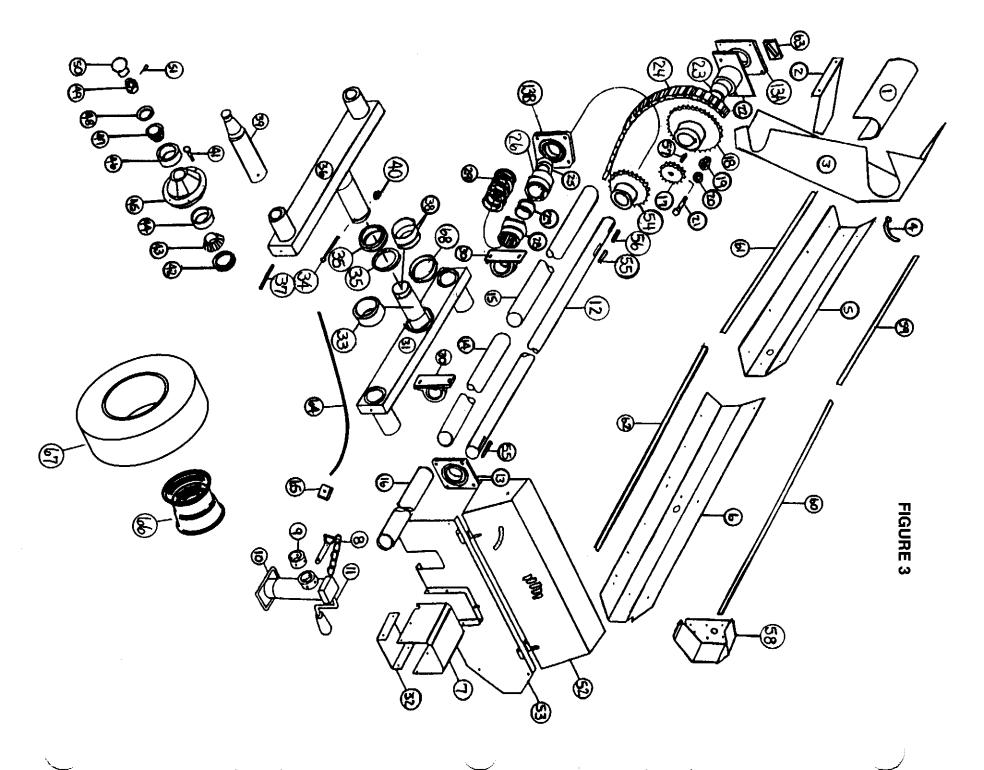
SHIELDS, SIDE SHAFT AND AXLE ASSEMBLIES
